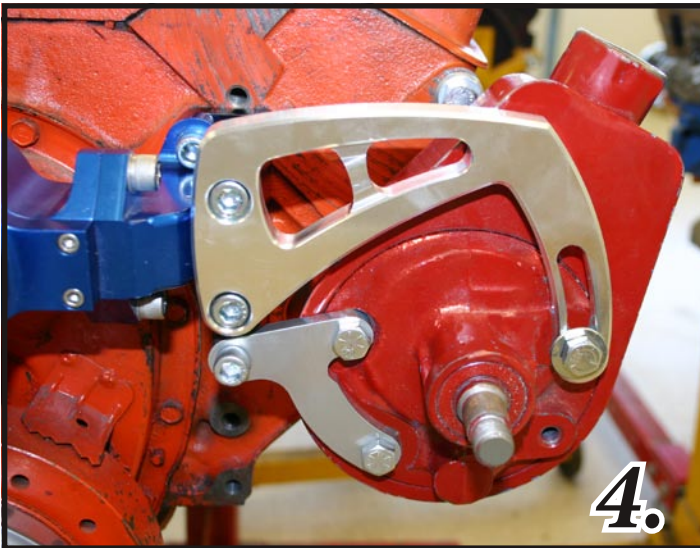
Install The Front Power Steering Bracket (22026-B) to the adapter bracket using (2) $\frac{3}{8}$ - 16 x $\frac{3}{4}$ " Socket Caps Screws (S244).
